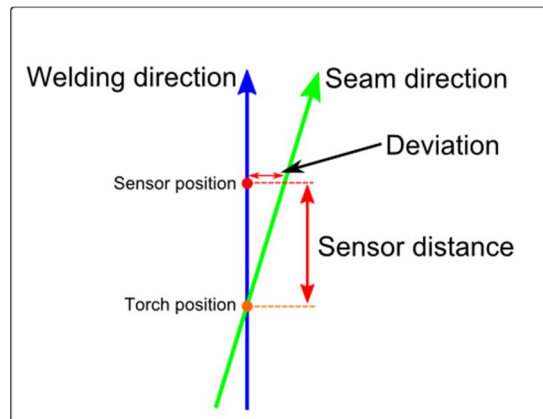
Exaggerated example of deviation error between seam direction and welding axis direction
